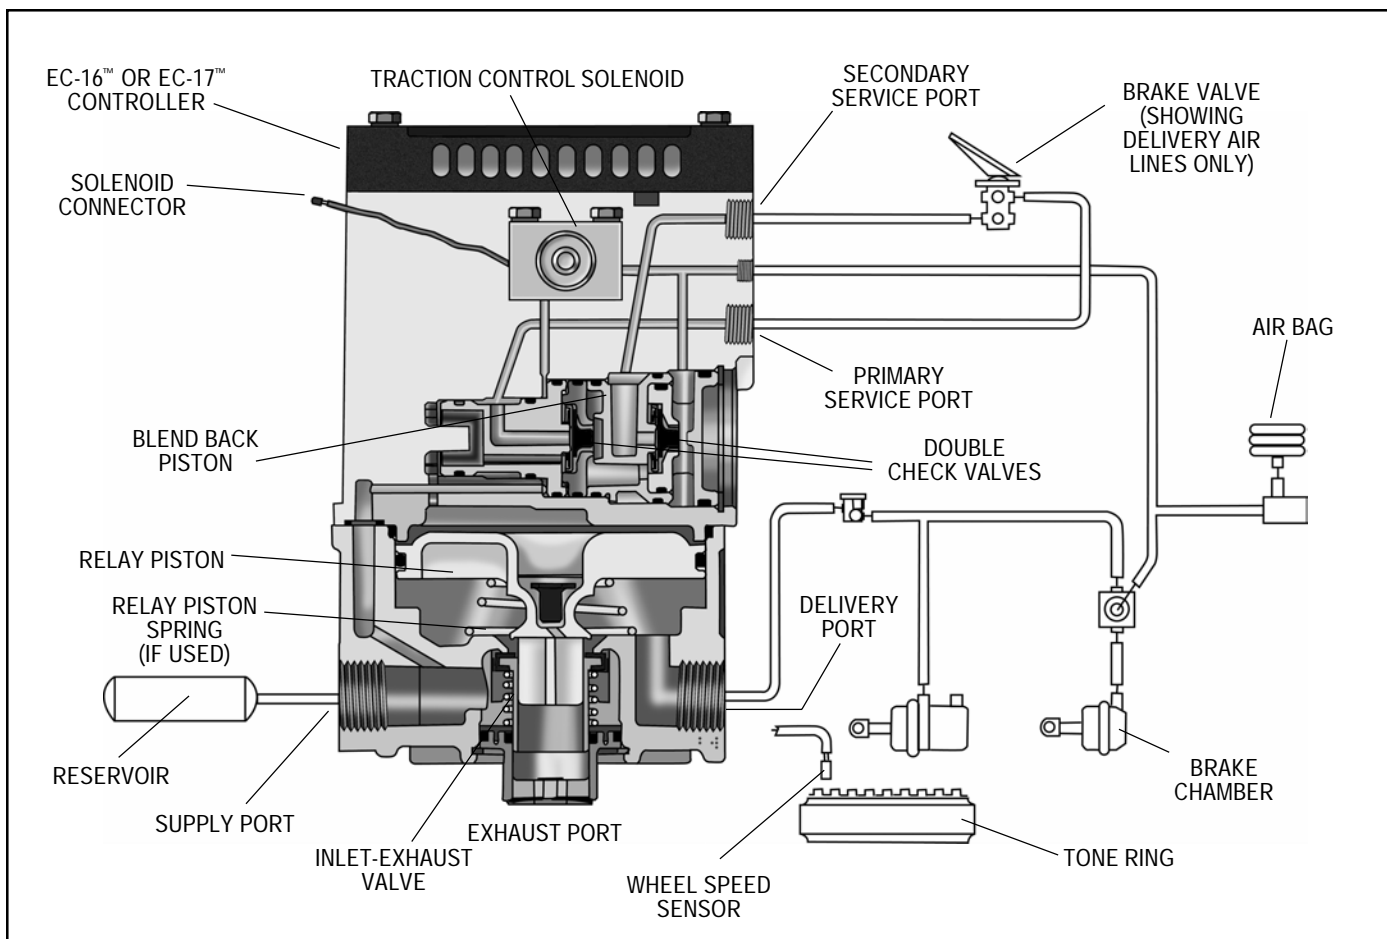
SECTIONAL AT-1DC™ ANTILOCK TRACTION ASSEMBLY
